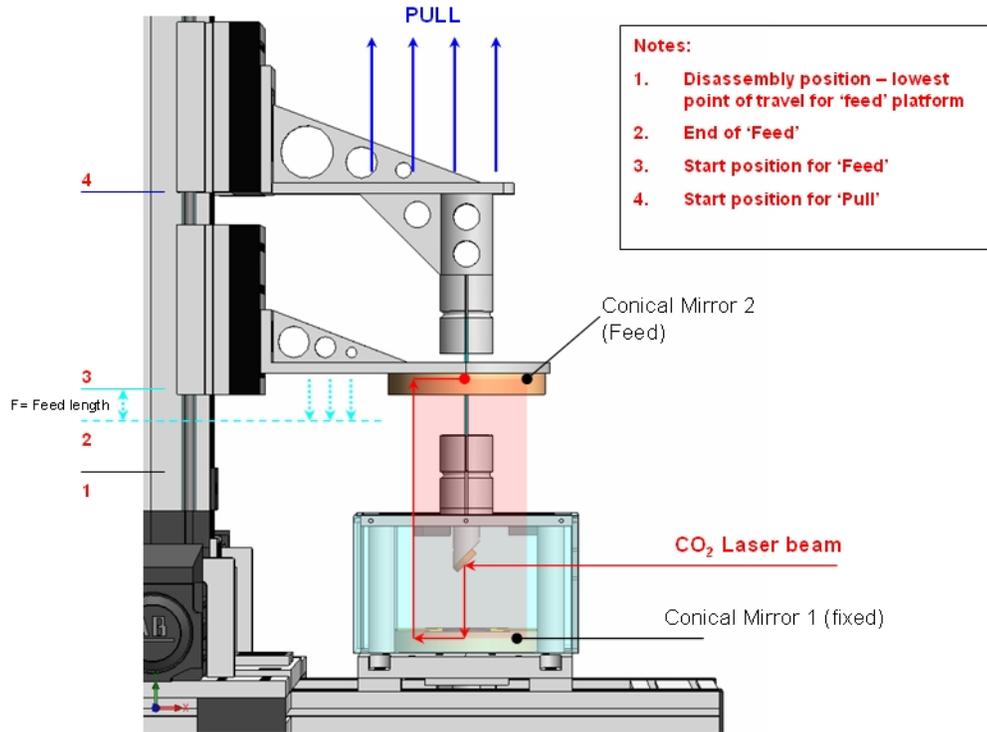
Feed & pull set-up for production of cylindrical fibres on prototype machine (manufacture and assembly of the beam shaping design in progress)
